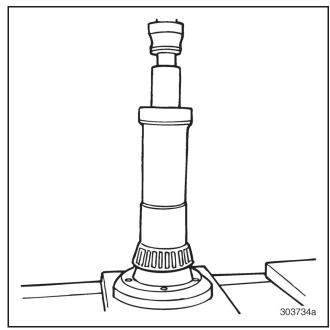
Pressing Bearing Cone onto Main-Drive Shaft
